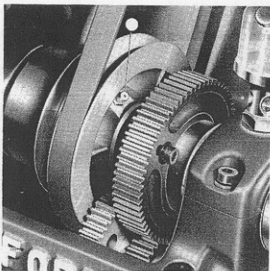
Showing the oil nipple for headstock pulley bearing lubrication
